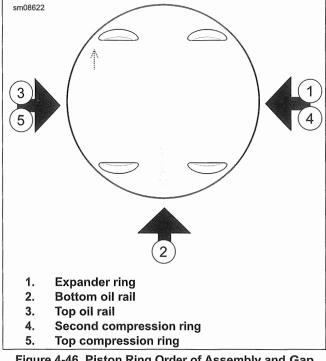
Piston Ring Order of Assembly and Gap Alignment
